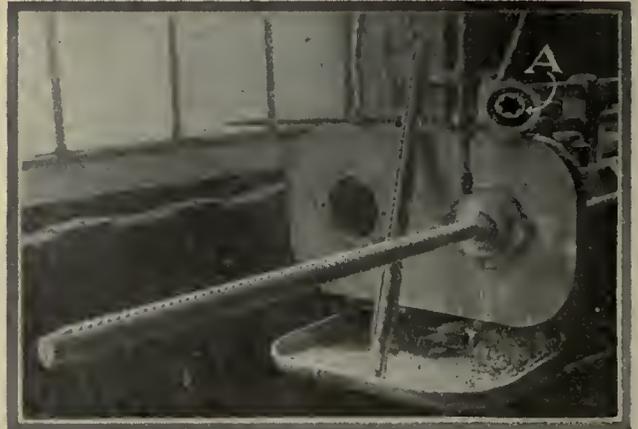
BROACHING SIX KEYWAYS ON TRANSMISSION GEARS.
